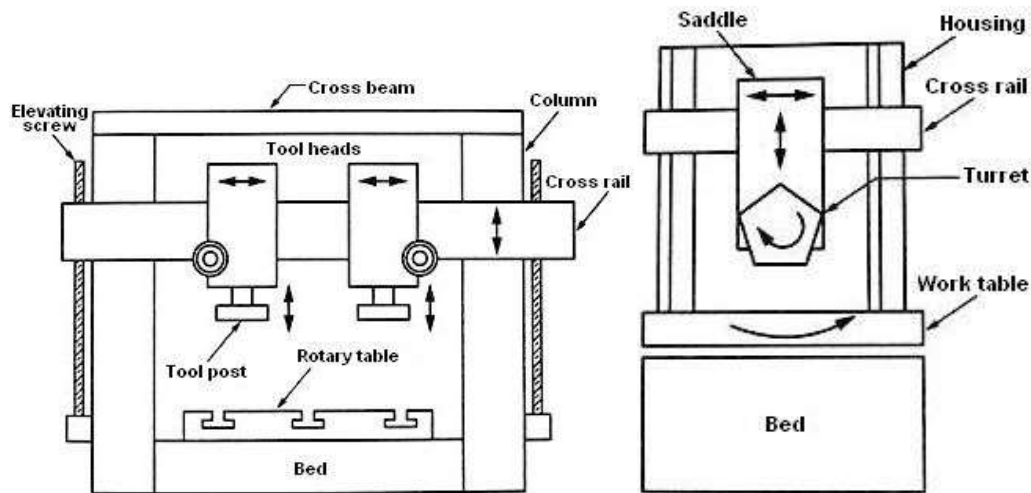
Double column vertical boring machine Fig. 3.138 Turret boring machine
